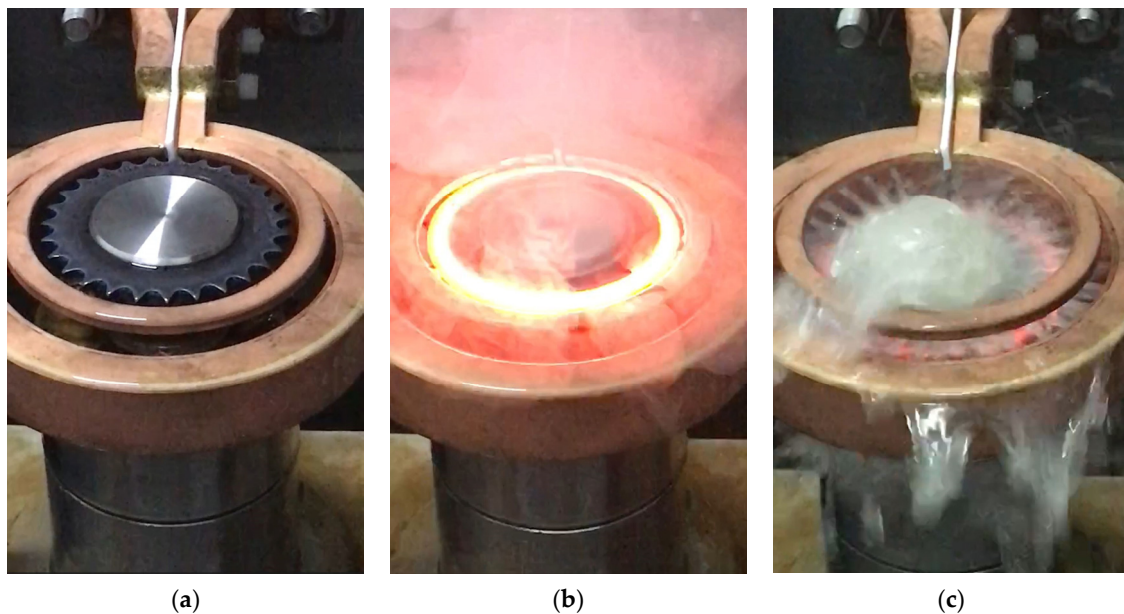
Experimental ISH process: (a) inductor and workpiece placement, (b) rotating and heating, and (c) quenching.
